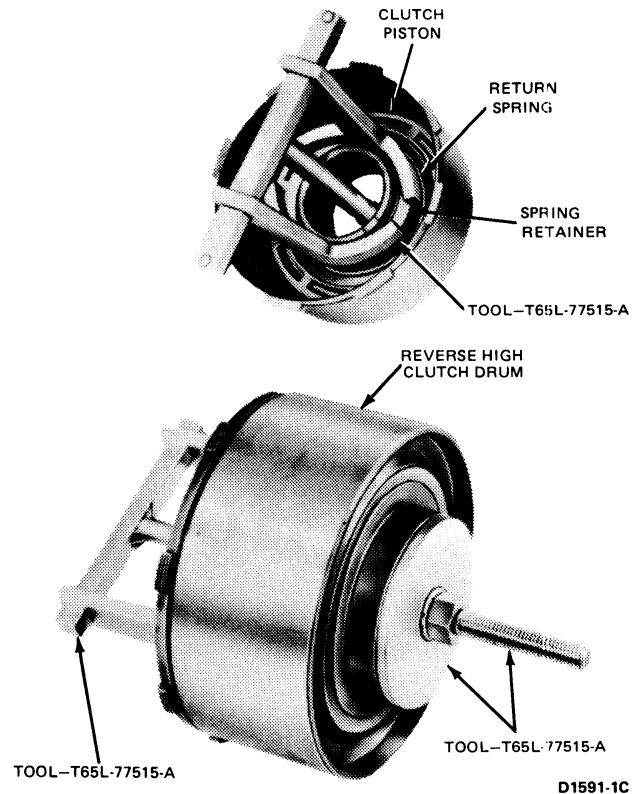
Removing or Installing Reverse-High Clutch Piston Snap Ring
